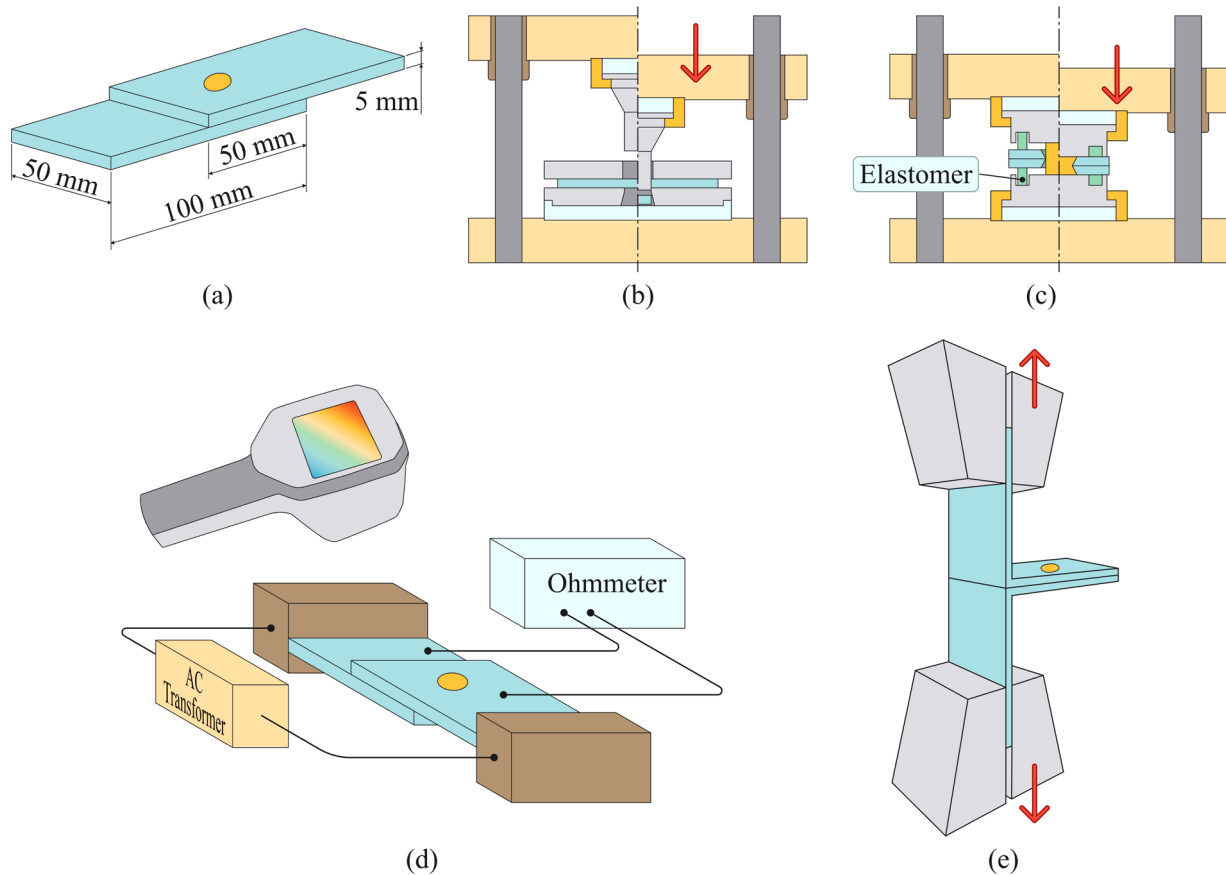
Schematic representation of the experimental workplan showing (a) the unit cells, (b) the punching tool set, (c) the compression tool set, (d) the thermo-electrical measuring apparatus and (e) the setup to perform the destructive peel tests.
